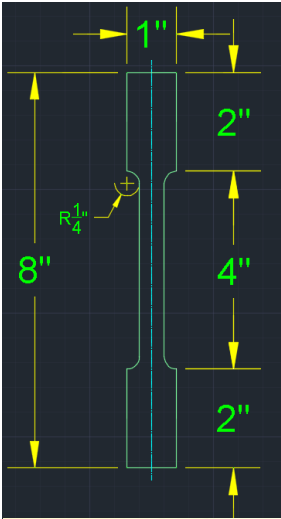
The final dimensions used on the tensile coupon for manufacturing and testing (thickness of $1/4$ " used).
